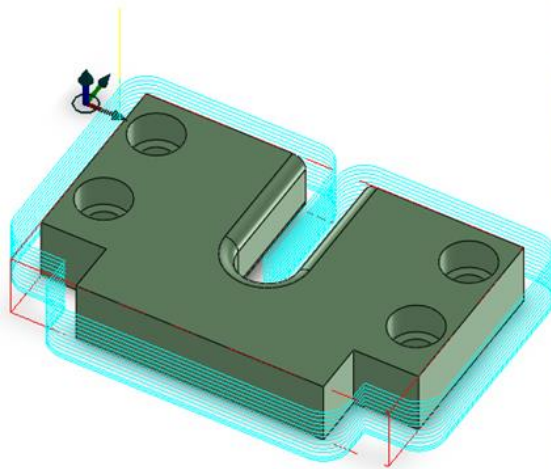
An example of the CNC machining being performed at the UNH CEPS machine shop on the Fryer MC-10.
